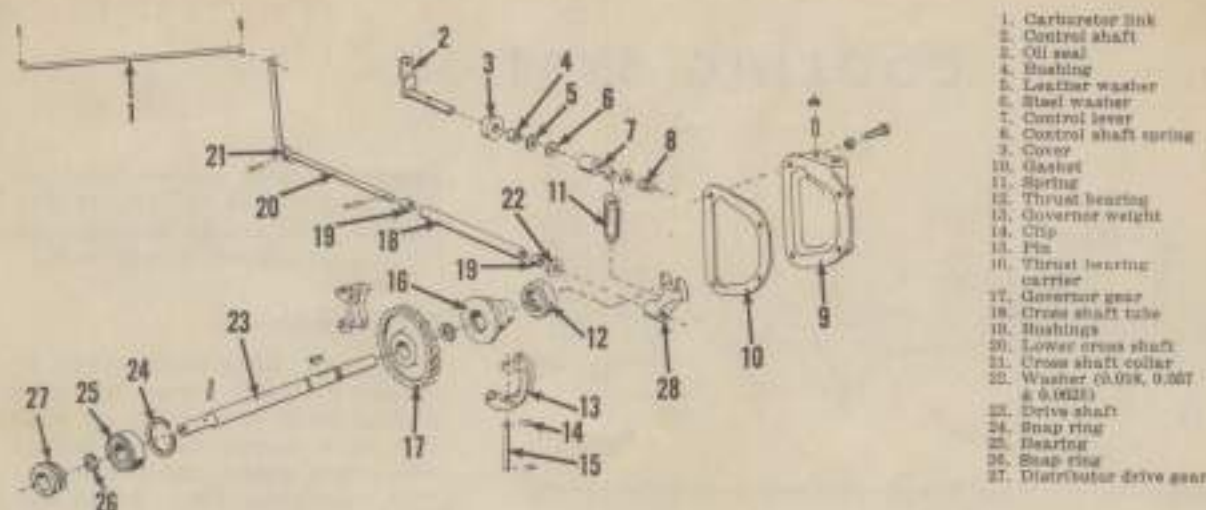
Exploded view of D-17 non-diesel governor and linkage. For non-diesel tractors prior to tractor Serial No. D17-42001 equipped with power steering refer to Fig. 15.
